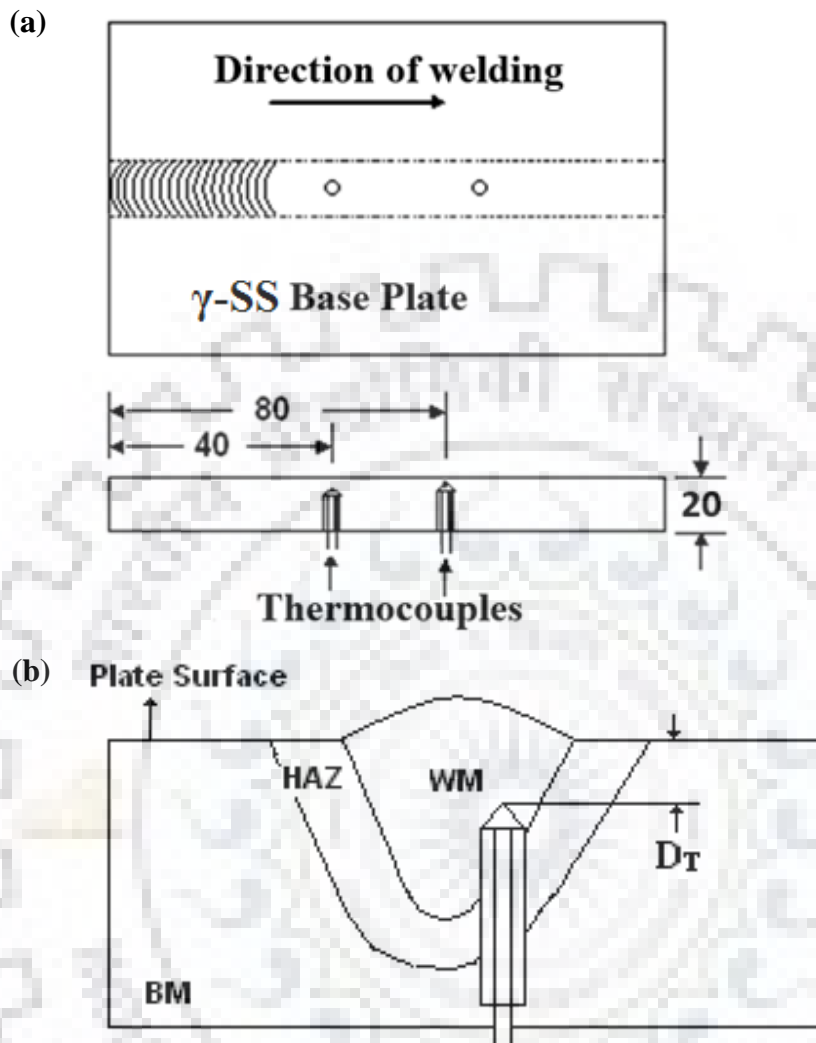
(a) Schematic diagram showing location of thermocouples in bead on plate deposition (b) Schematic diagram showing the depth of placement of thermocouple (D_T) and typical macrograph showing placement of thermocouple in weld pool.
